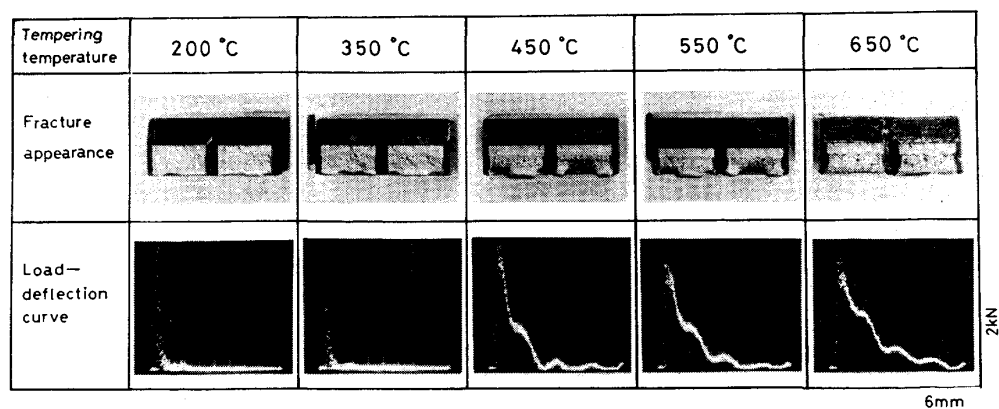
Typical fracture appearances and load—deflection curves obtained in fatigue cracked specimen
